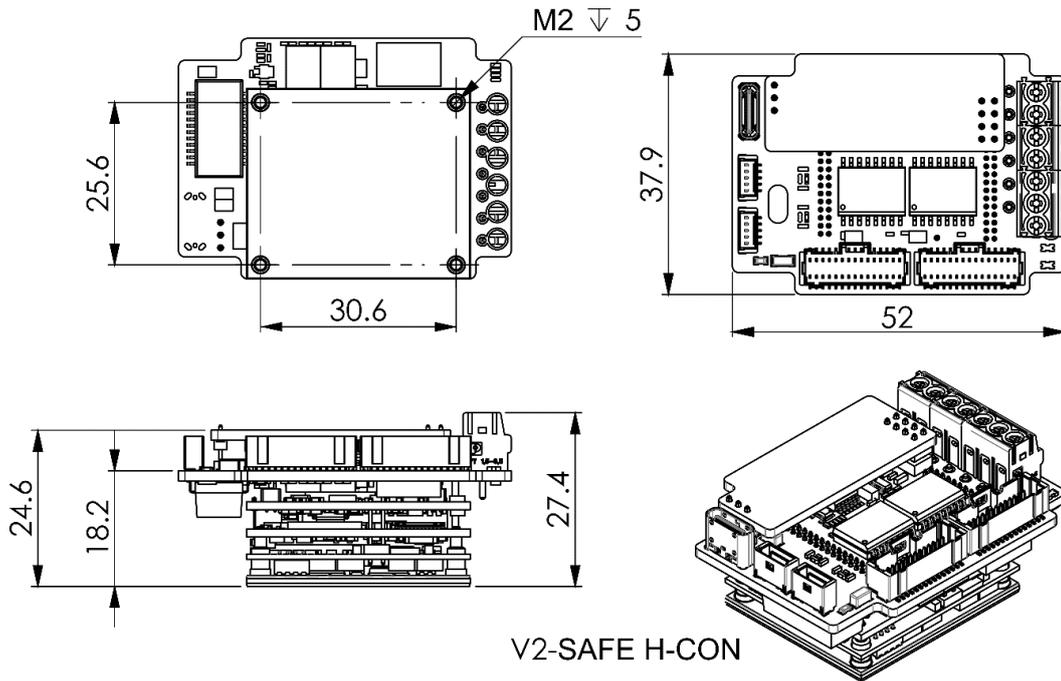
Platinum Solo Twitter – Horizontal Connector version without Heat Sink Dimensions
